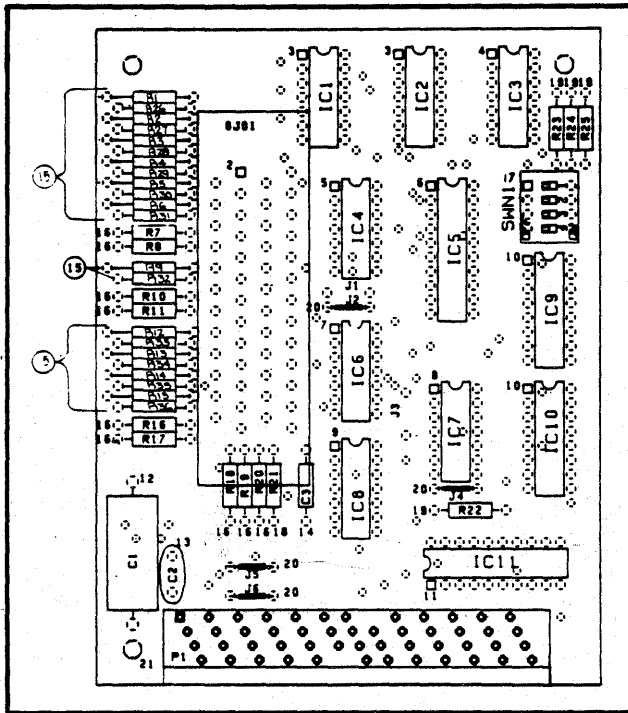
I/O CONNECTOR ASSEMBLY (SHORT LINE DRIVER WITH PARITY)
